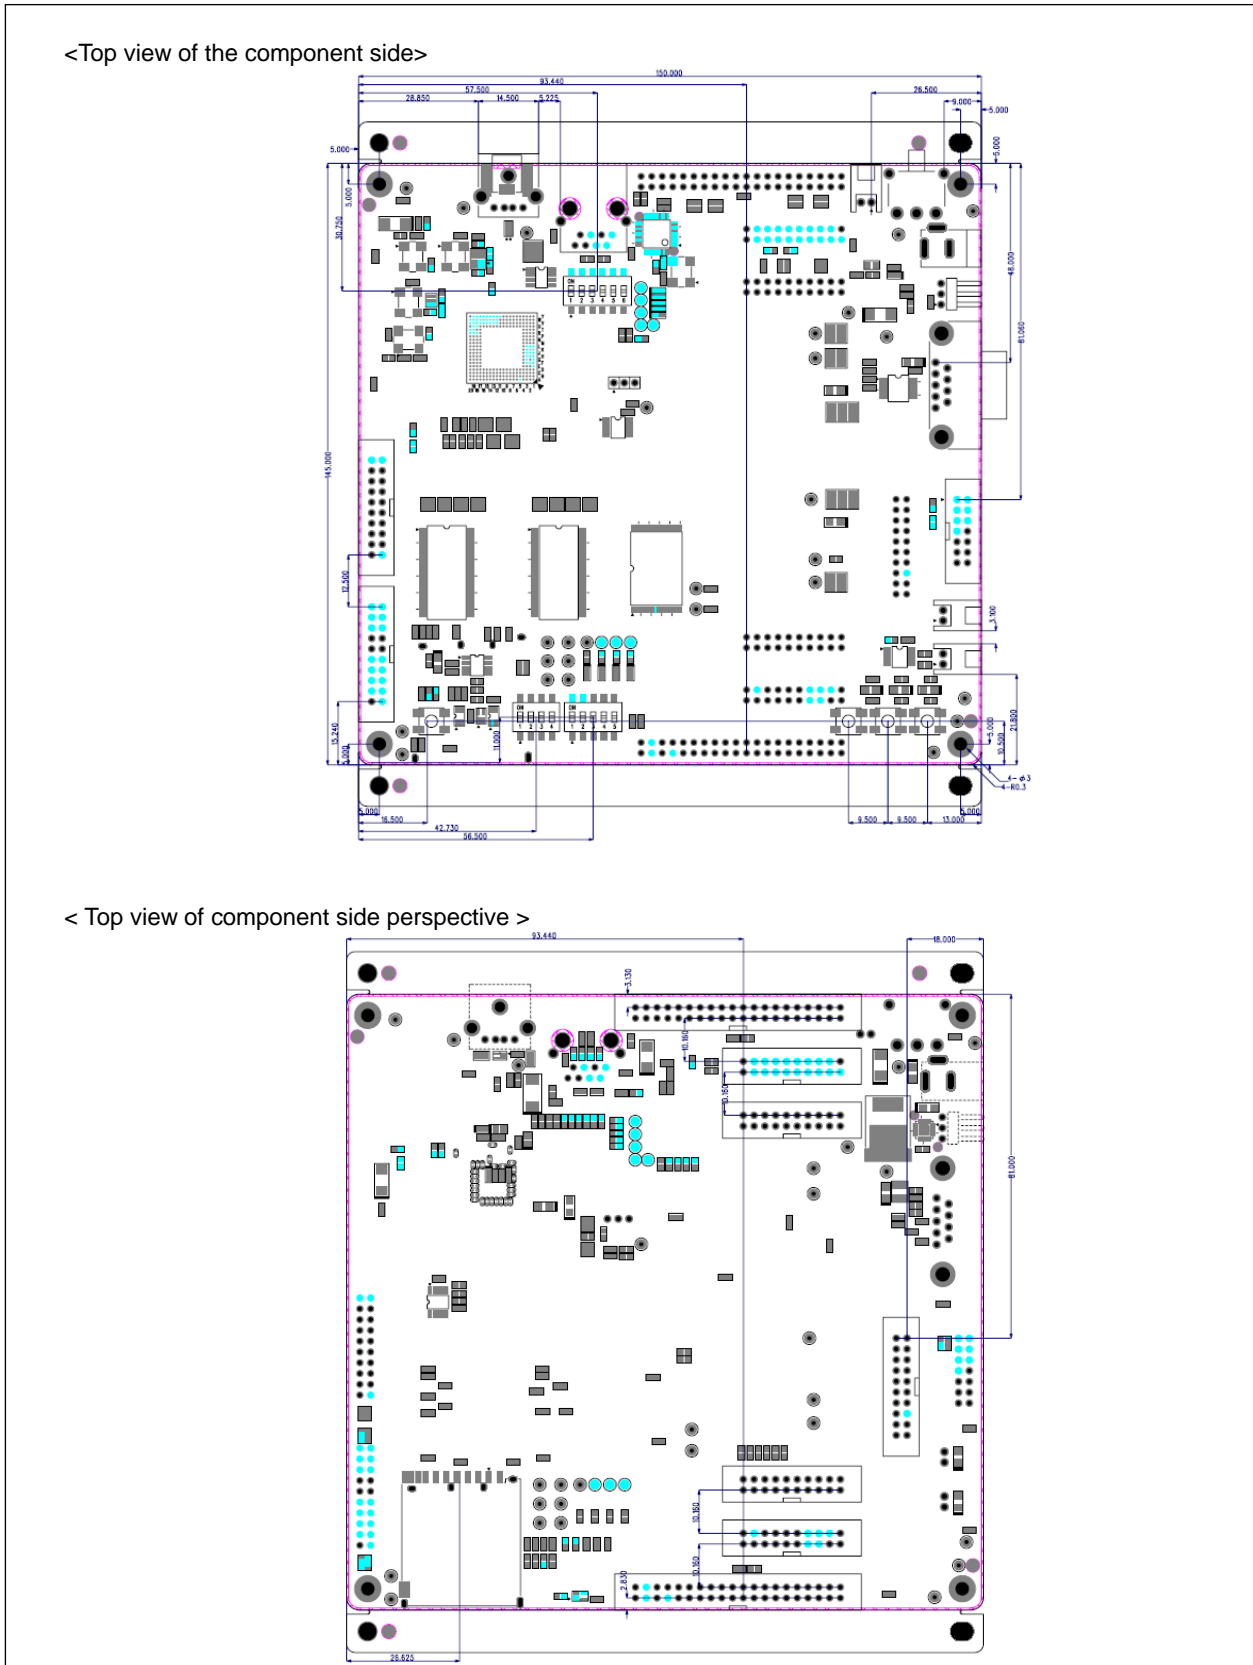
Board Dimensions of SH7670 CPU board
